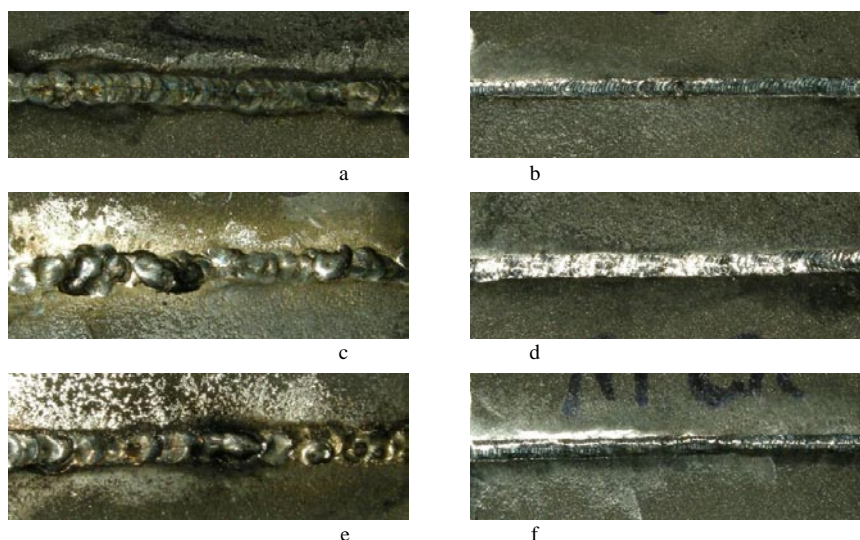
Macroscopic images of dissimilar welded samples: a. microplasma welded without filling material; b. laser welded without filling material; c. microplasma welded with Co-Cr filling material; d. laser welded with Co-Cr filling material; e. microplasma welded with Ni-Cr filling material; f. laser welded with Ni-Cr filling material.
